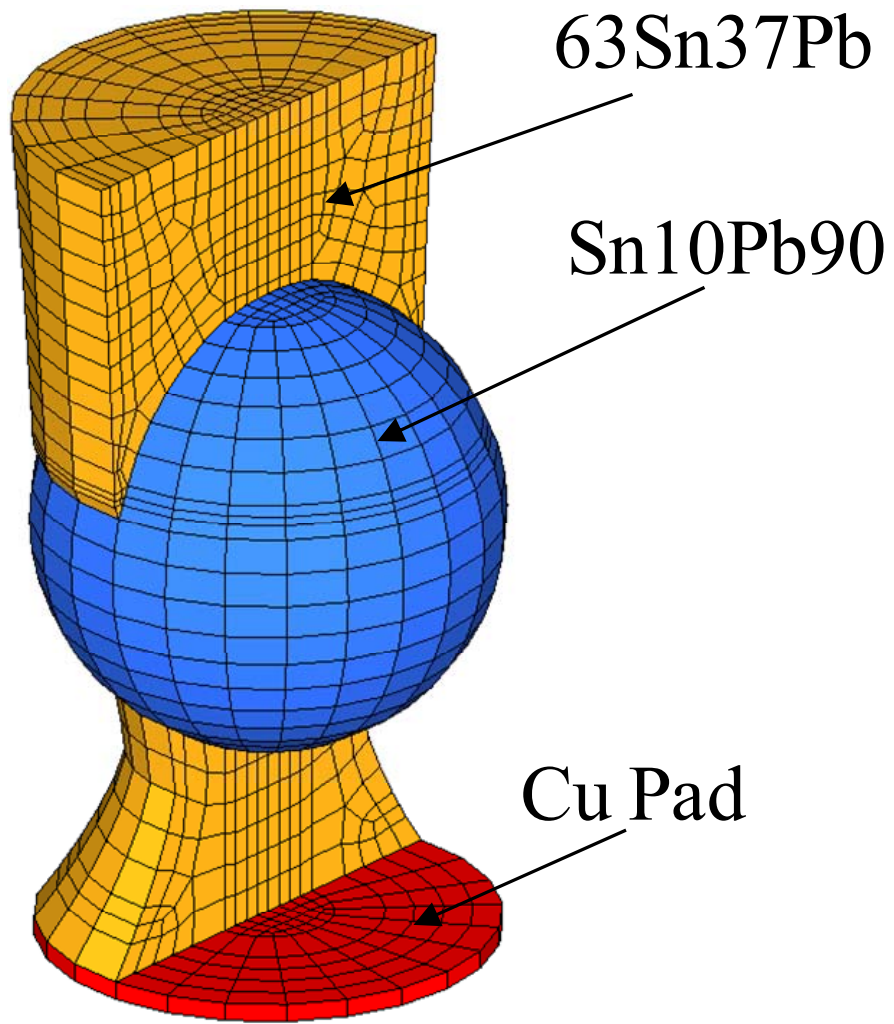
Cut Section view of FE model for 90Pb10Sn Solder Joint on CBGA interconnect
